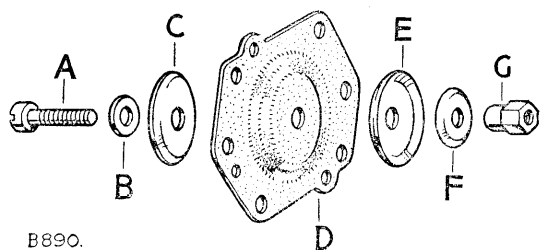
Layout of accelerator pump membrane assembly, 2 litre Petrol
